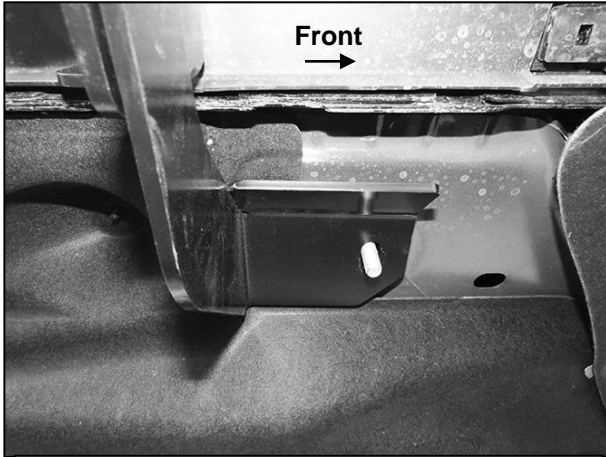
Insert "S" Spiral Bolt into opening after removing clip (arrow)
